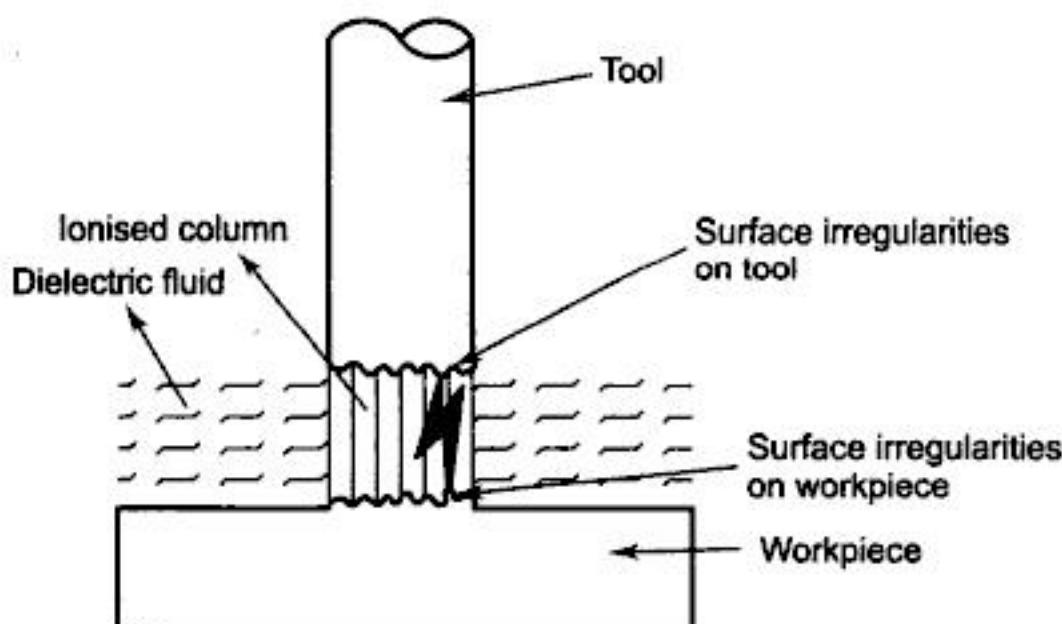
Schematic diagram of the arc forming at the smallest distance between the tool and the workpiece in the EDM process
